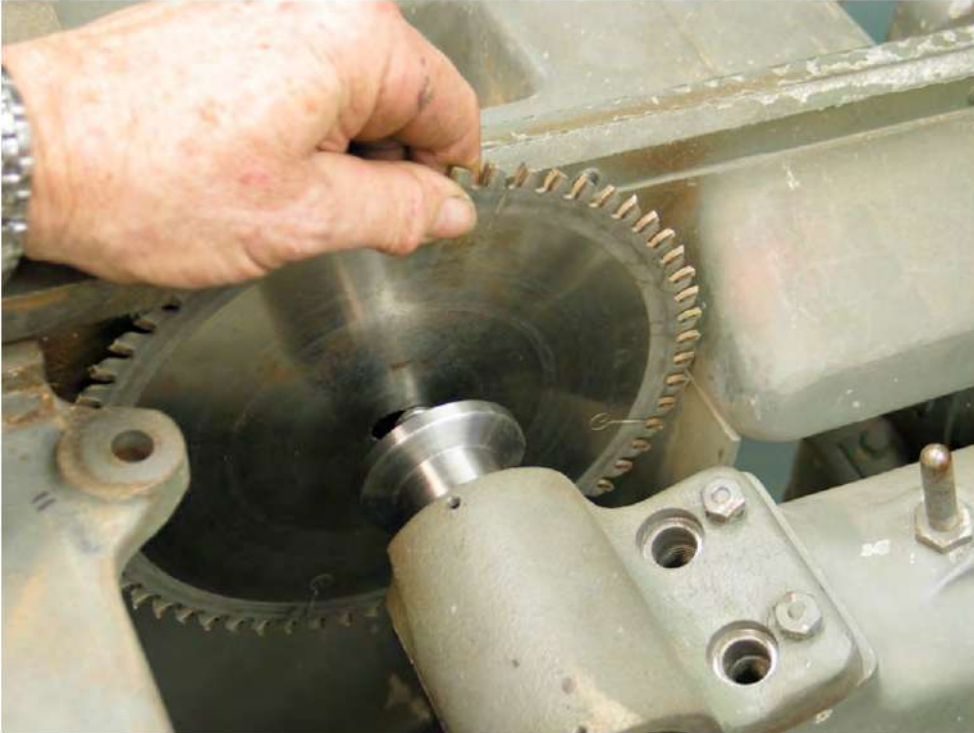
Temporally install the arbor to determine bearing placement and also where the castings will have to be cut. Note the 8-1/2 inch blade will not go on the arbor in the lower position.
